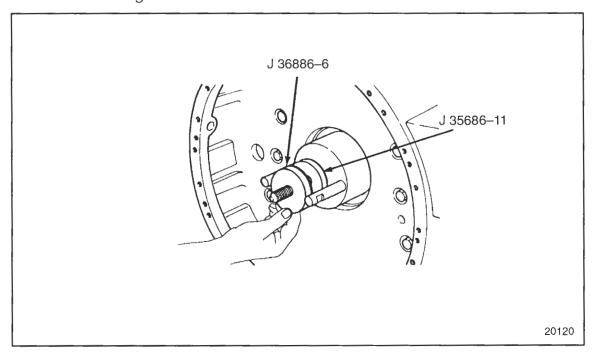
Rear Oil Seal Installation Spacer Setup
